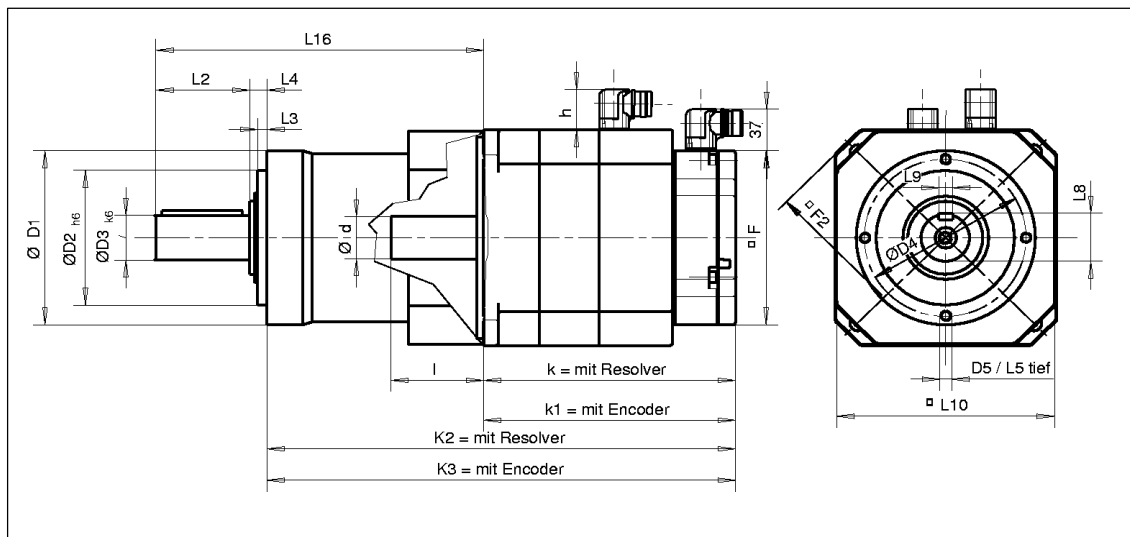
Dimensions, 1FK6 motor (shaft height 100) with planetary gearbox (alpha Company, LP series)
